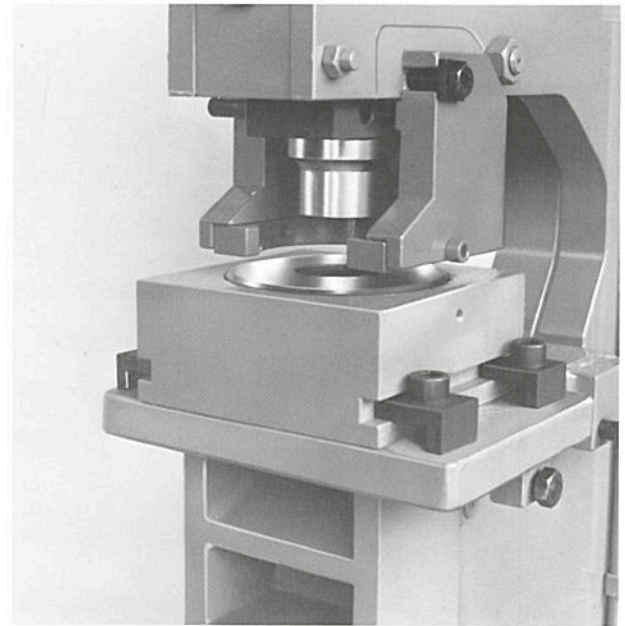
Special Punching Equipment to Carry punches and dies greater than 50.5 mm and up to 100 mm cutting diameter
